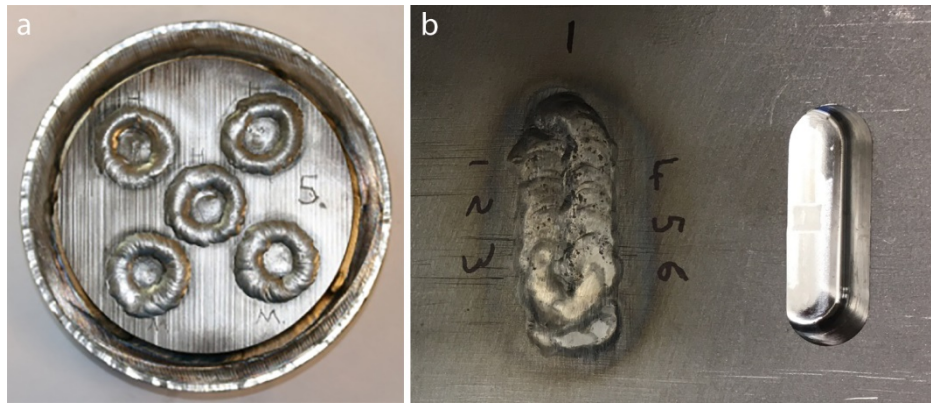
(a) Welded disc of Haynes® 282®, Paper II. [99]. (b) Linear groove design used in Paper III for cast ATI 718Plus®.
